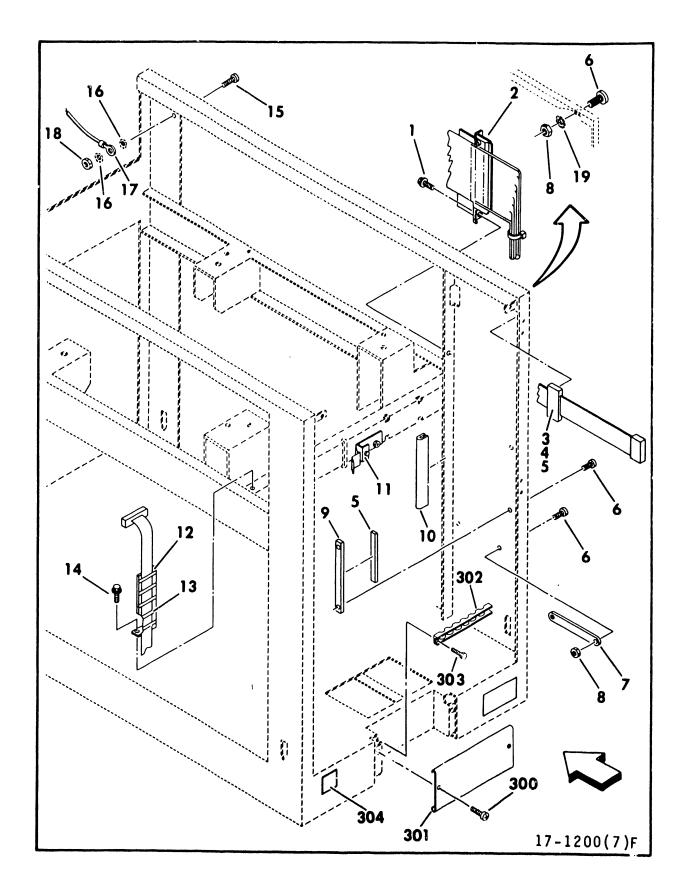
A-12. Frame & Air Assembly (Sheet 8)
